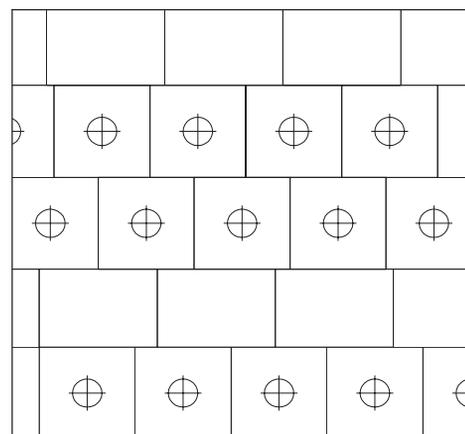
Scheme of a spinning nozzle of a die for polyethylene granulation surface part with vacuum brazed sintered carbides plates; cutting plates have holes, and plates without holes are used as distancing elements
